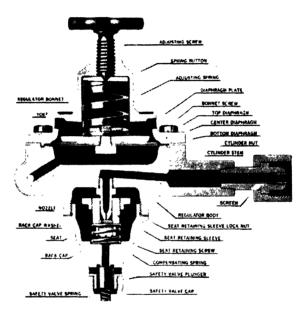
A nozzle type regulator (Courtesy of: Torchweld Equipment Company)
